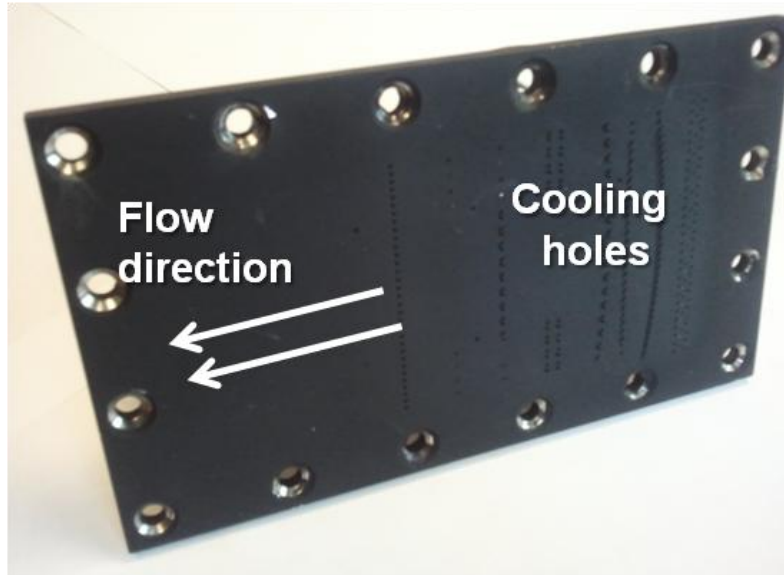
Hot side image of the optimized cooling array flat plate with shaped holes.
